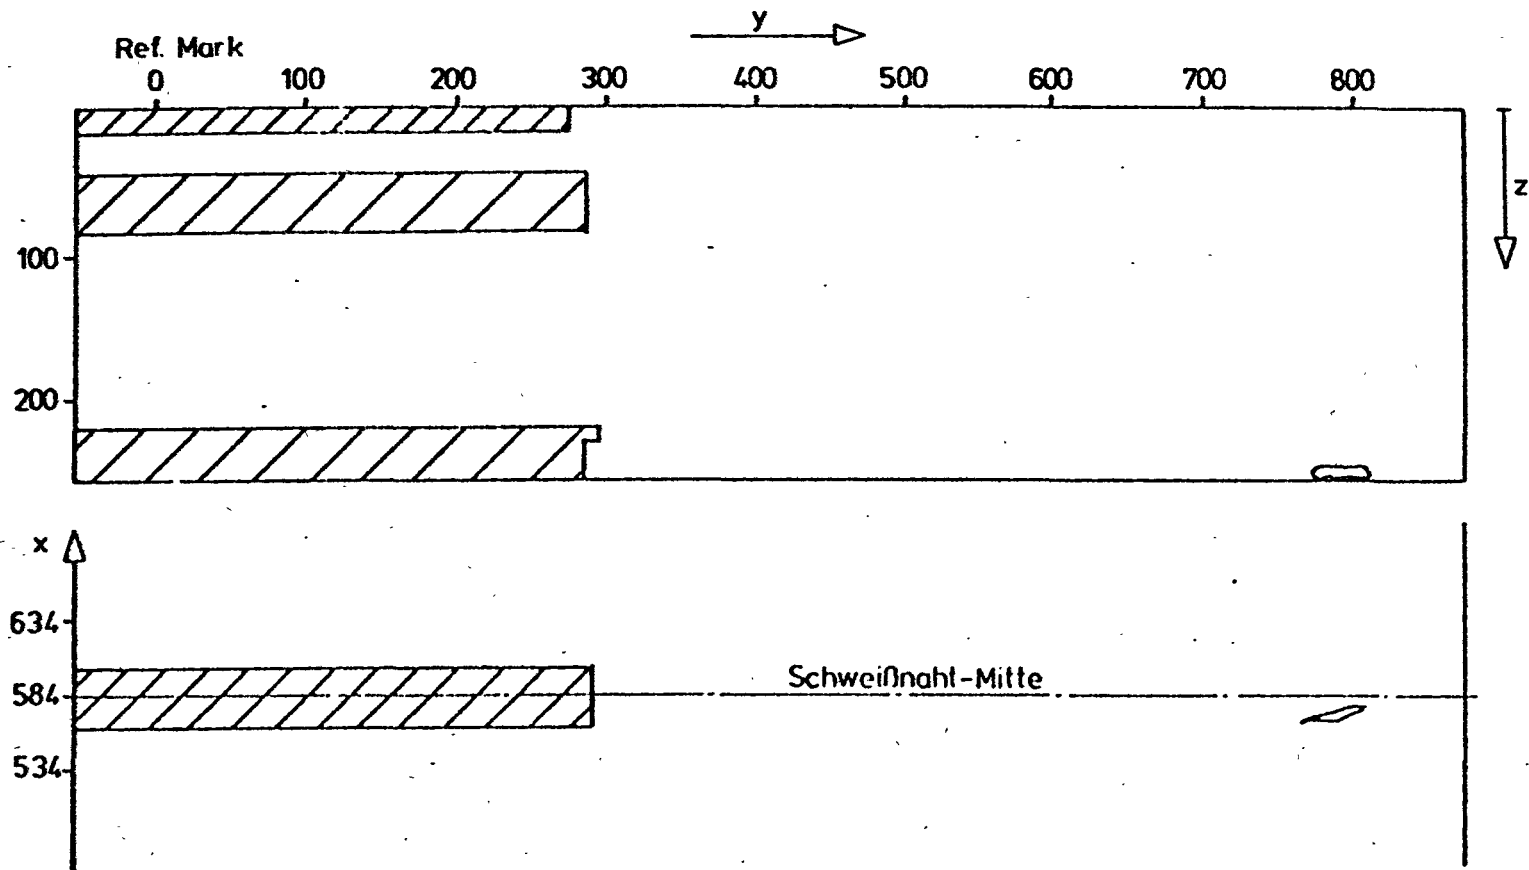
Fault-Position-Plan of the Testspecimen 50-52
